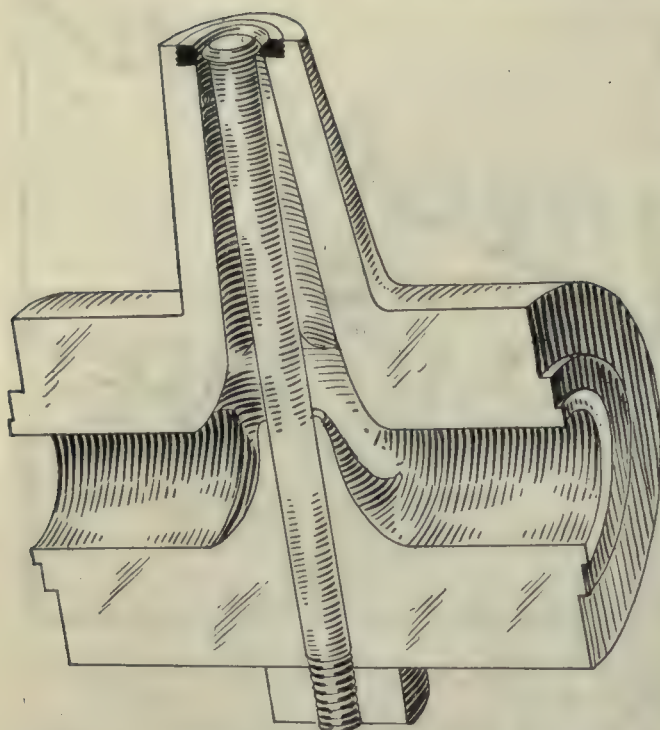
SECTION OF MOLD OF TRAP-EXTRUDING MACHINE
